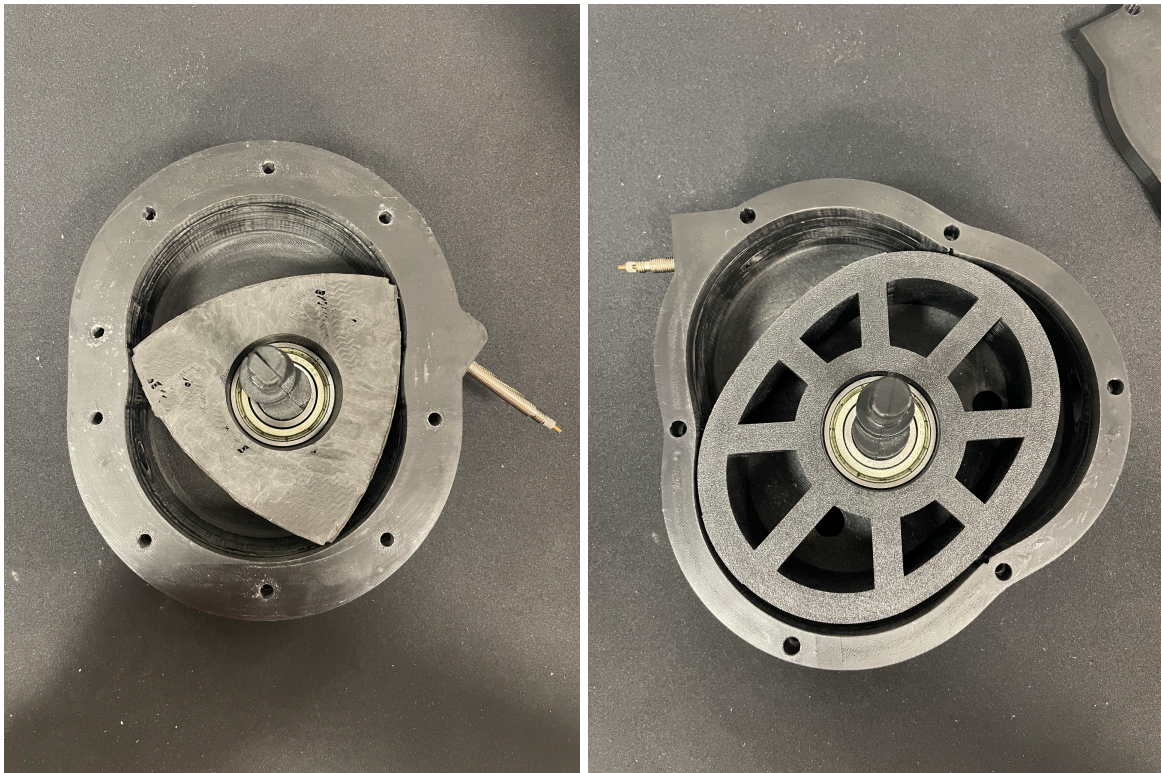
3D printed Wankel and LiquidPiston engines with open housing
